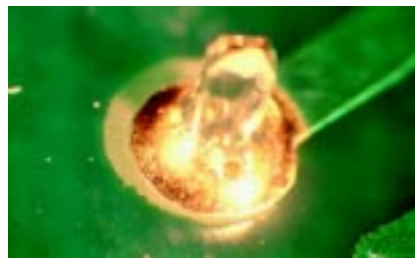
Water trapped inside the glass epoxy gets super heated during the soldering process. The escaping vapor may cause blowholes in solder joints.
